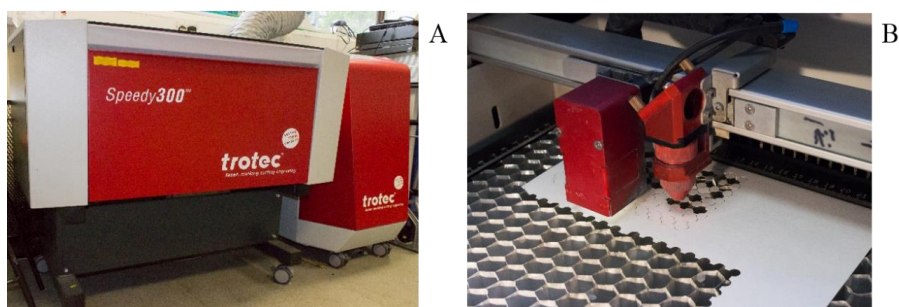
Class 2 CO₂ laser cutter. A) Trotec Speedy 300 Laser Engraver. B) The inside of the laser.
